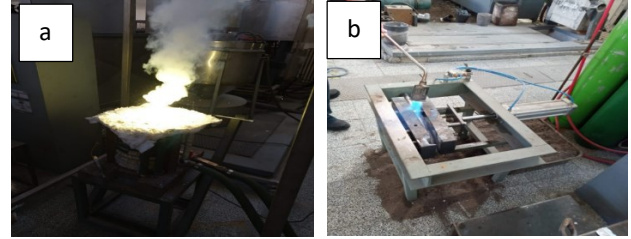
a) Representation of the sample melting process, b) Mold and Preheating process with Pneumatic Mechanism.
